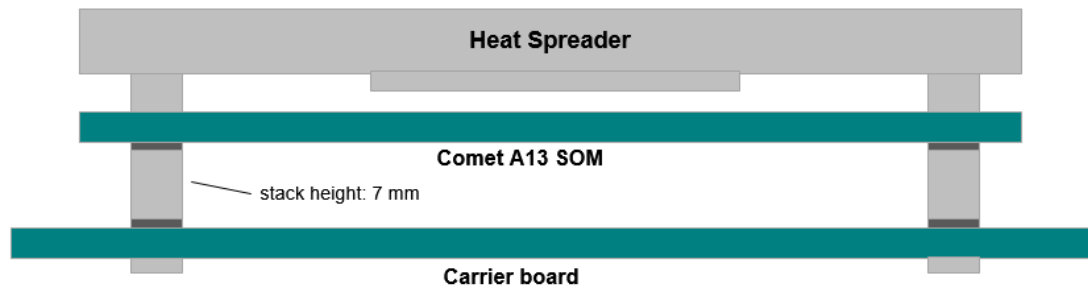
Mechanical Stack-up of Comet A13 SOM and Heatsink
